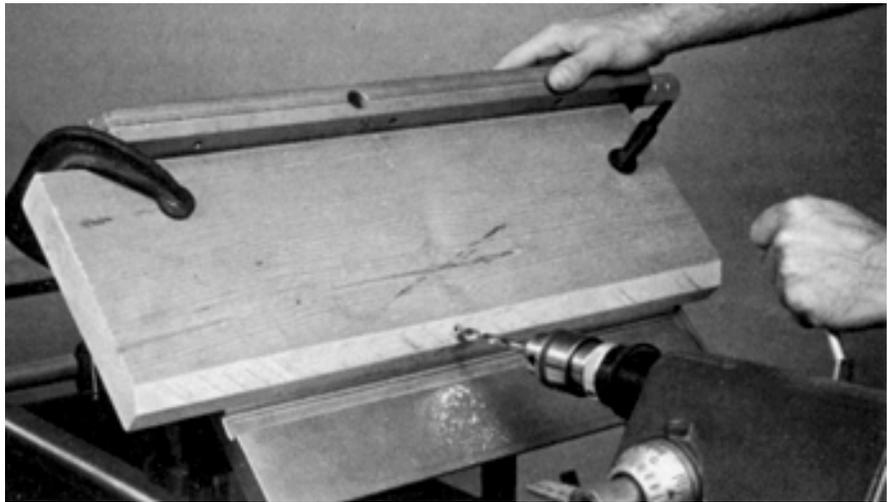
To bore a hole at an angle, tilt the table use the fence as a backstop or clamp the workpiece to the table.
